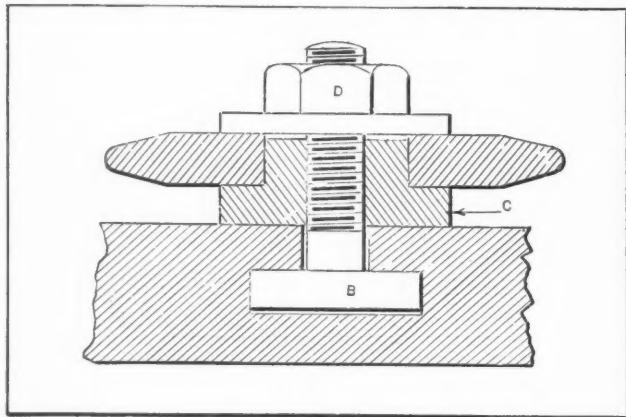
Forming Cutter Mounted on Faceplate for Relieving Cut
